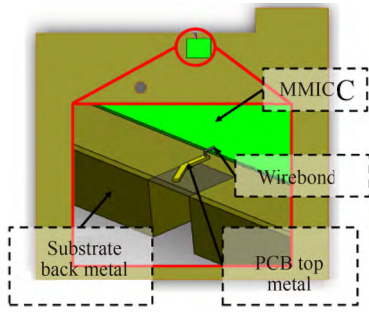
The zoom-in diagram of PCB on which MMICs are mounted
